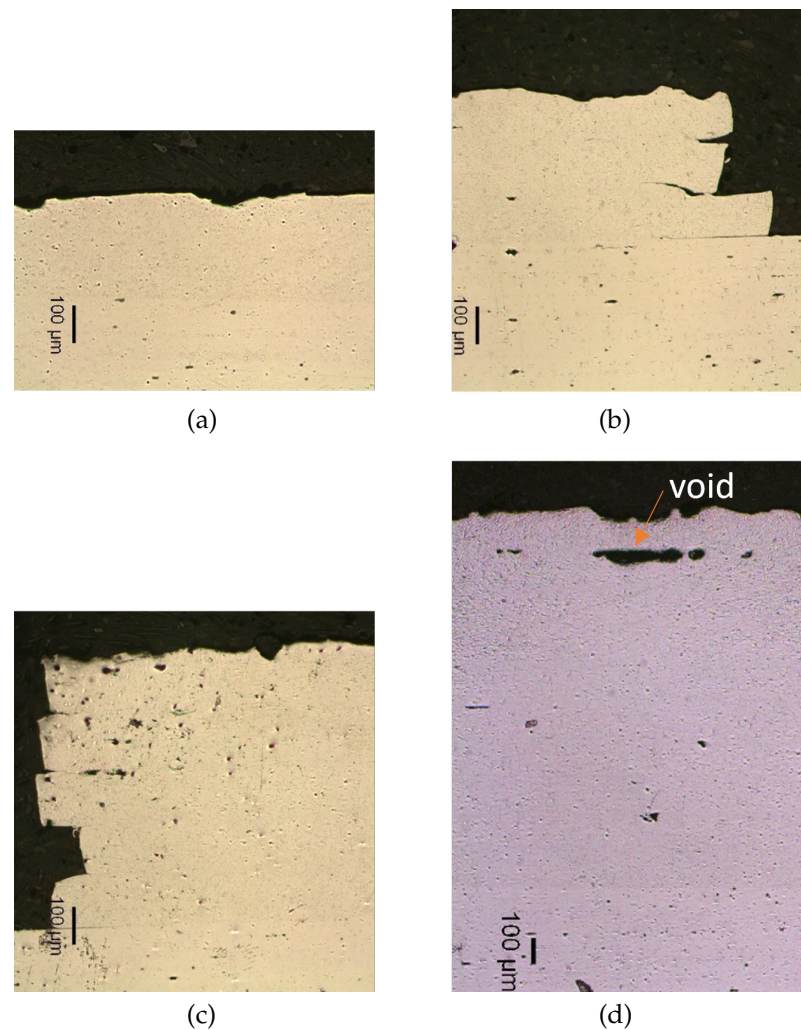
Optical images of (a) 2-, (b) 3-, (c) 5-, and (d) 10-layer Al 6061-H18 welds constructed on a 12.7 mm (0.5 inch) thick Al 6061-T6 baseplate using the following weld parameters: 32 μm welder amplitude, 5000 N weld force, and 84.67 mm/s (200 in/min) weld speed.
